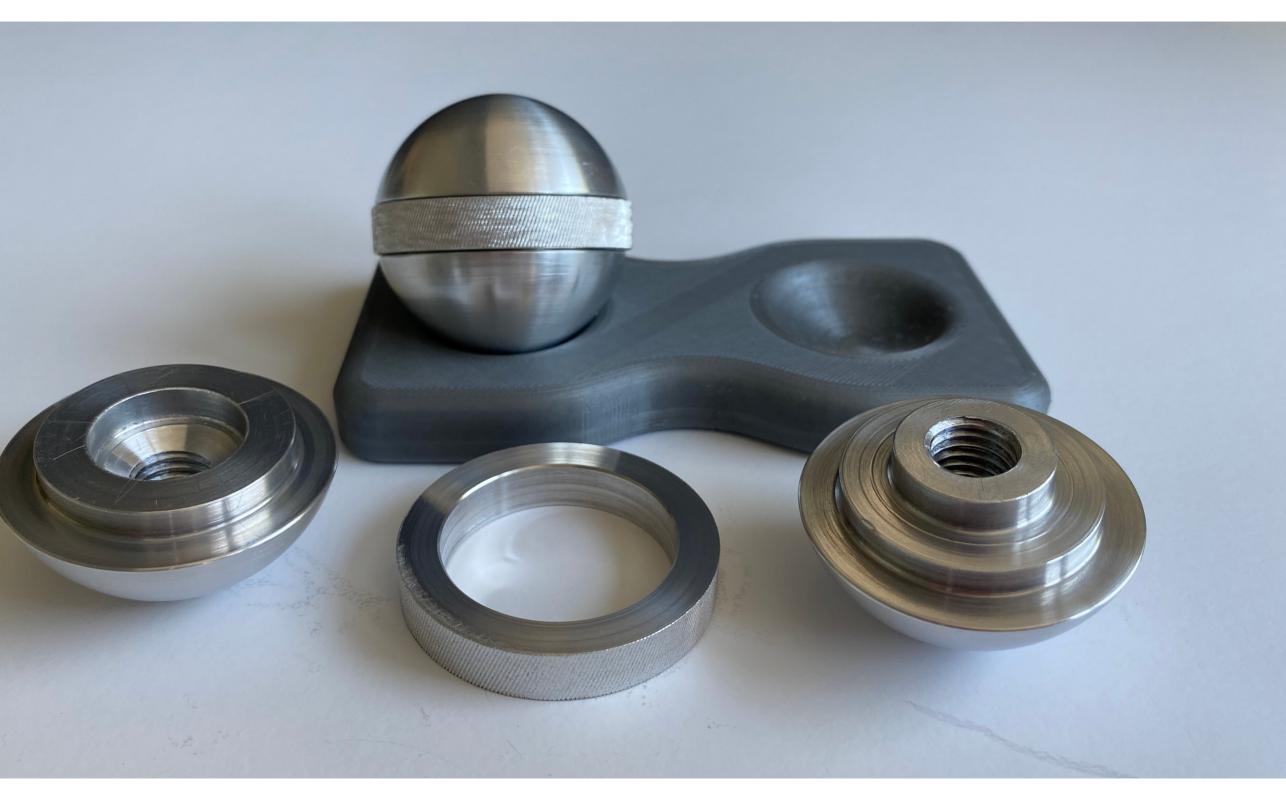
Hemisphere Body Being Screwed On Custom Lathe FixtureFigure 55.(Next Spread) Fidget Spheres Looks Like Prototype with Stand
